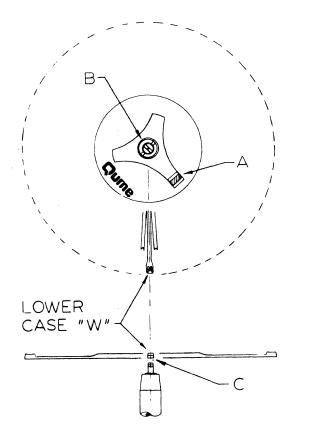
PRINTWHEEL INDEX ADJUSTMENT
